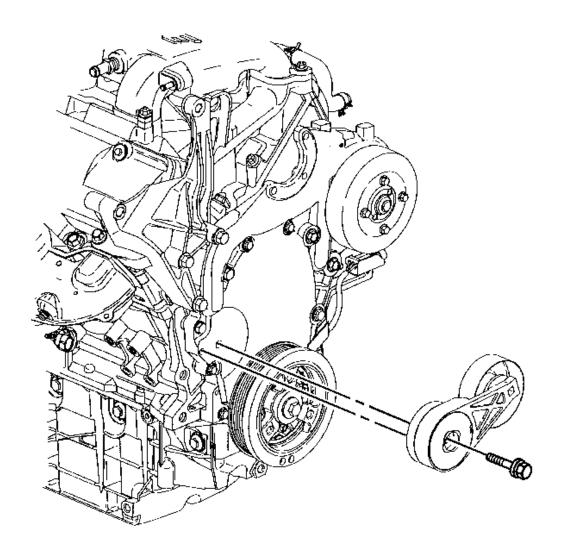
Installing Drive Belt Tensioner Courtesy of GENERAL MOTORS CORP.
